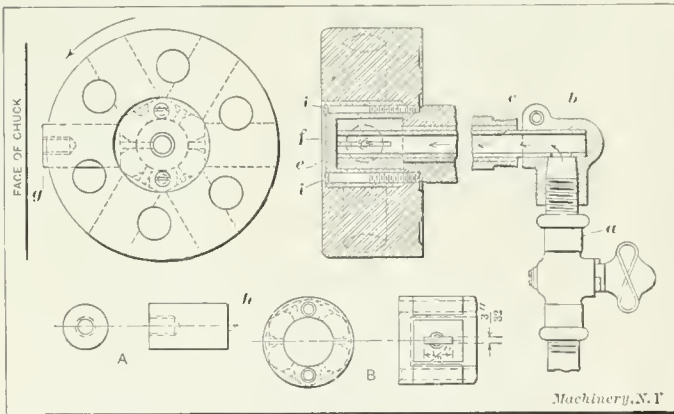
Sectional View showing Construction of Oil-pumping Attachment for Turret Tools
